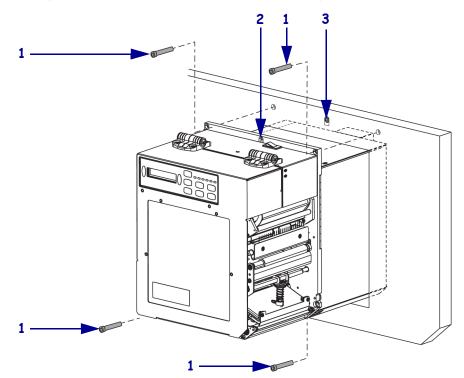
• Front View of 110PAX4 Print Engine in Applicator
